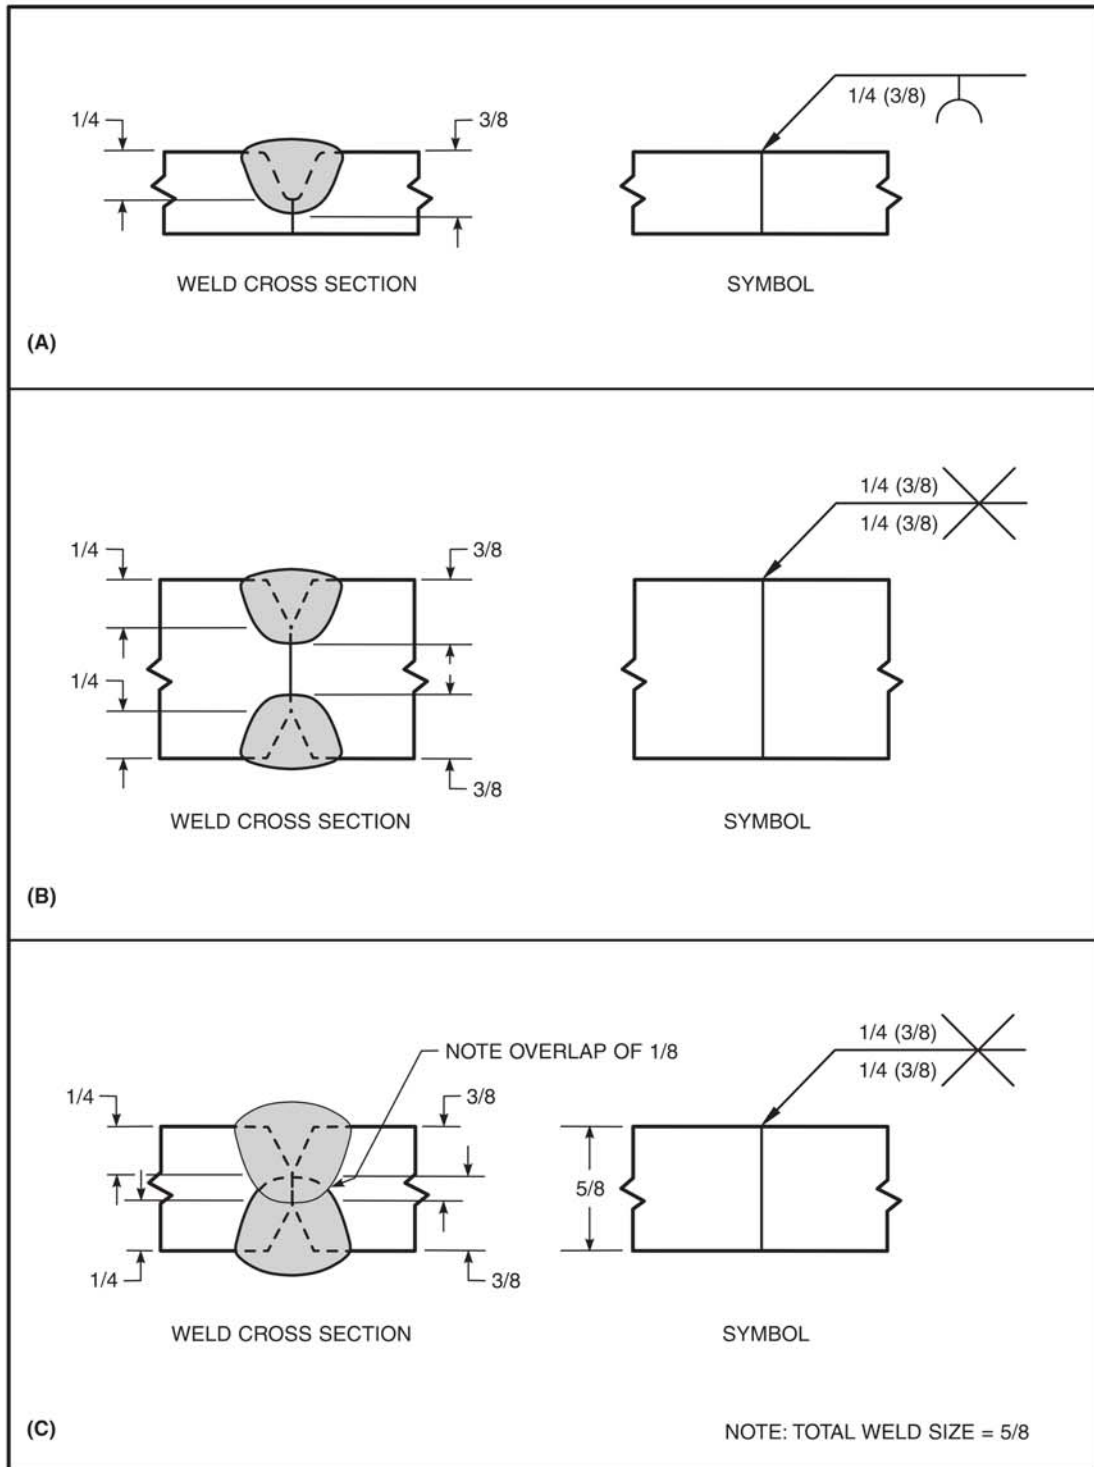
Specification of Groove Depth and Groove Weld Size
